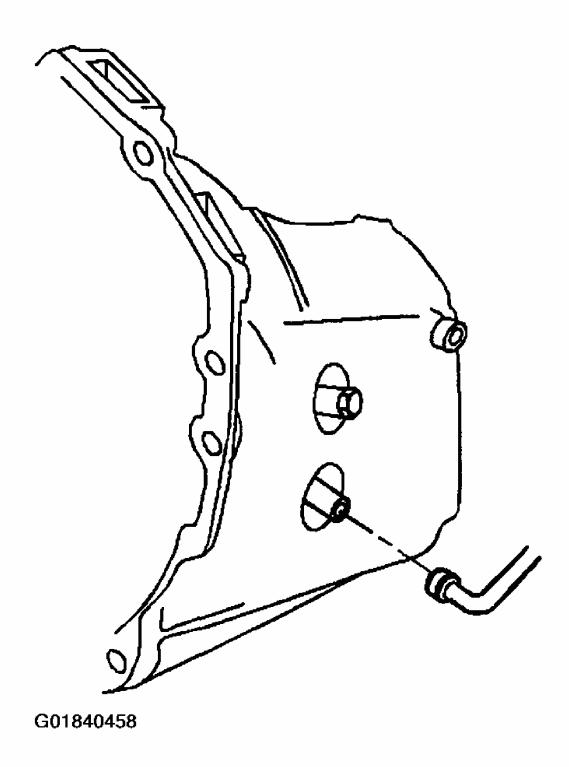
Installing Concentric Slave Cylinder Clutch Line
